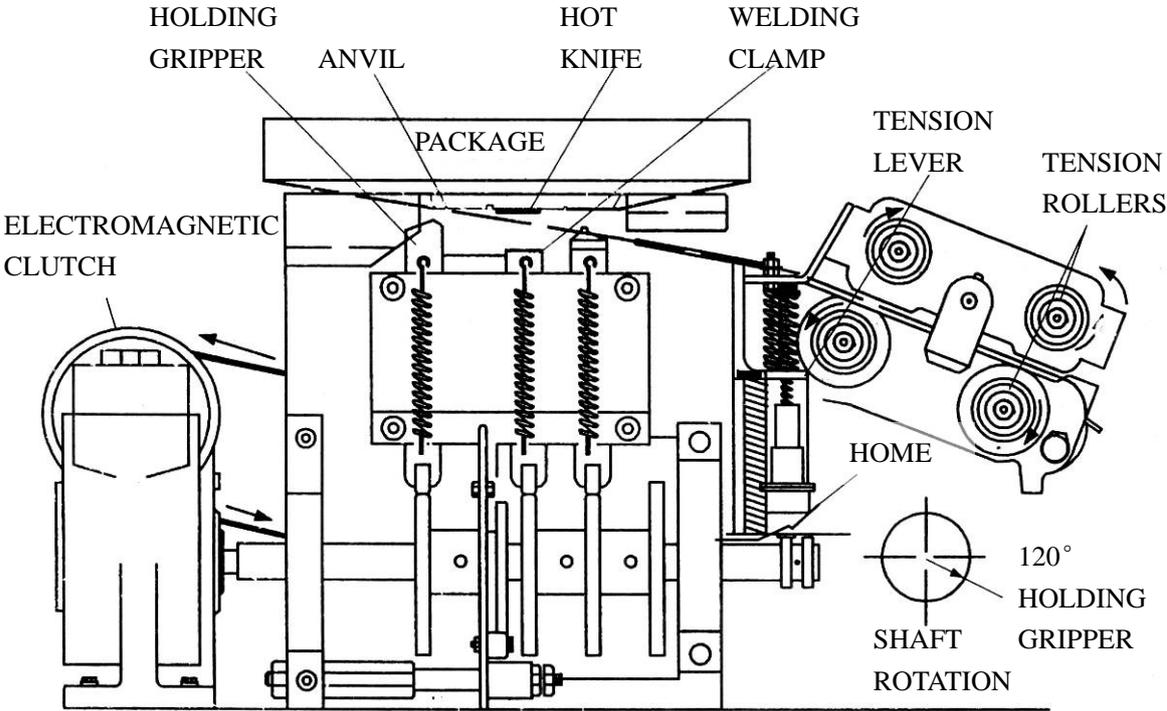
HOLDING GRIPPER AND HOT-KNIFE
